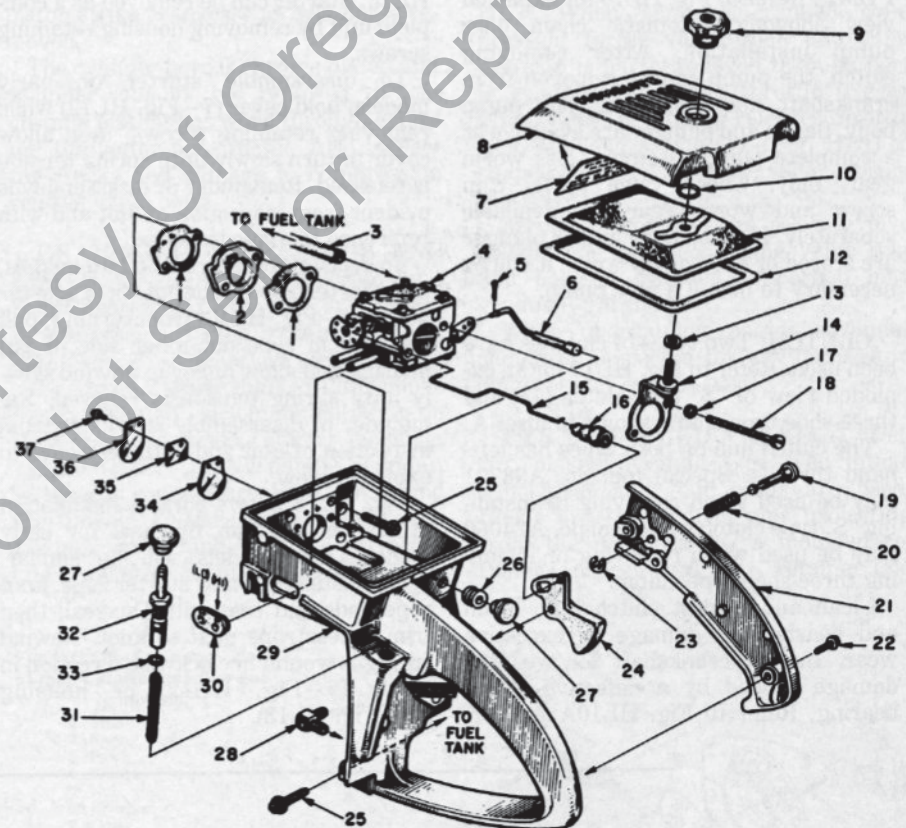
Exploded view of air box (throttle handle) and related parts on models with flat reed intake valve (34). Refer to Fig. HL31 for models equipped with pyramid reed valve.
